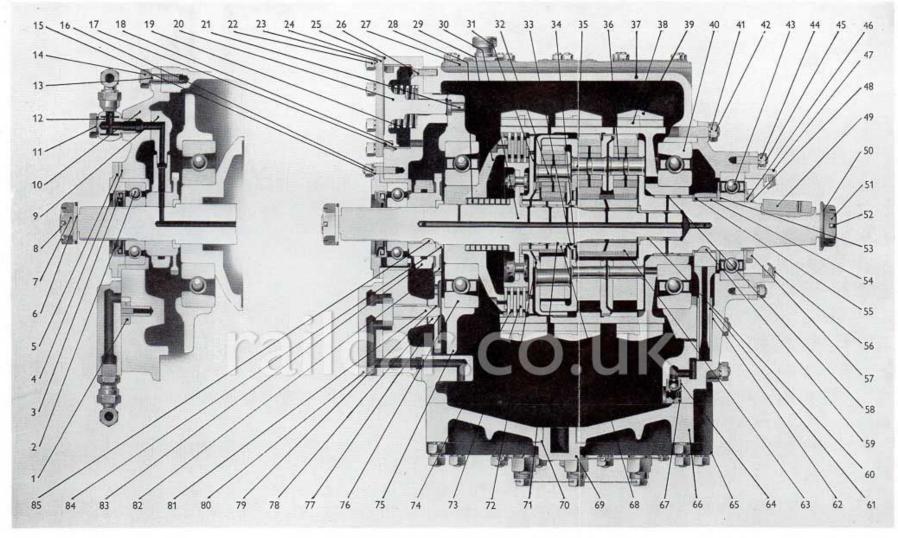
SECTION THROUGH GEARBOX. LIST No. 5742-5743.
